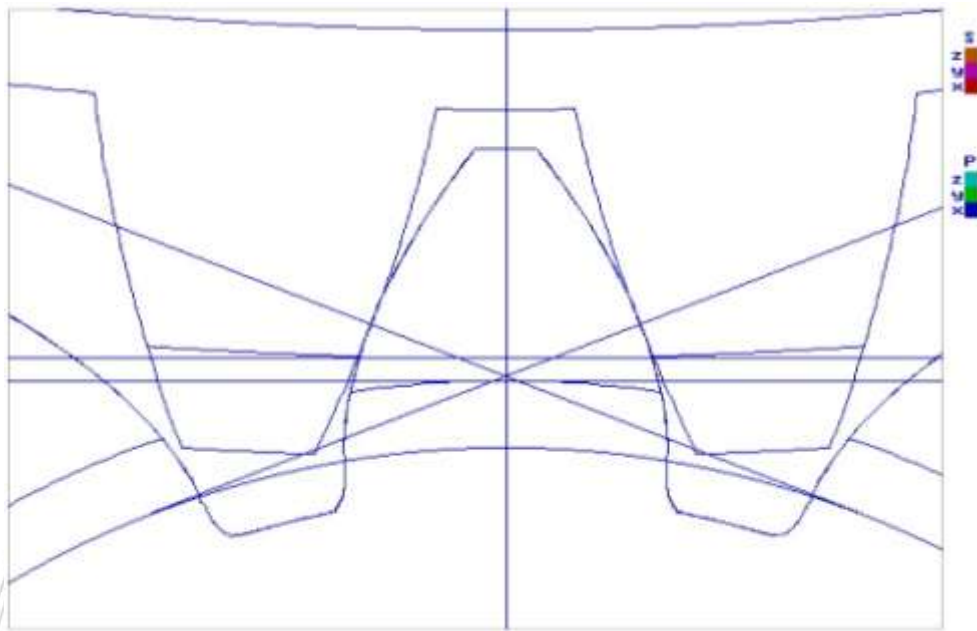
Representation of the gear after data input and of the sprocket determined by generalized machine-tool.
